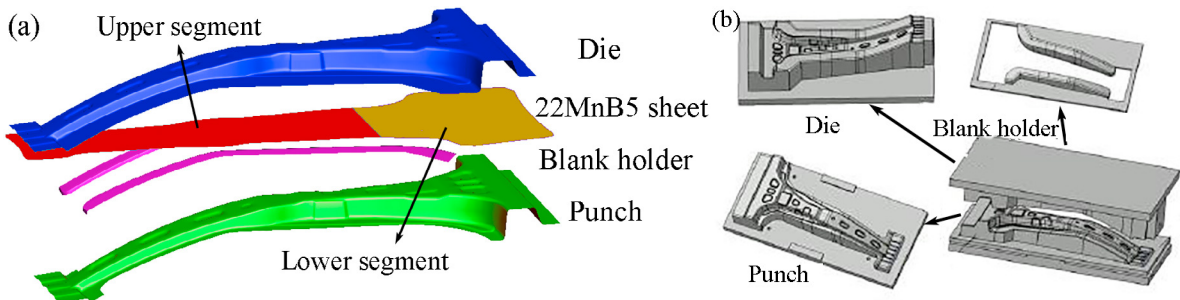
FE model (a) and drawings of tools (b) of B-pillar hot stamping by partition heating.
